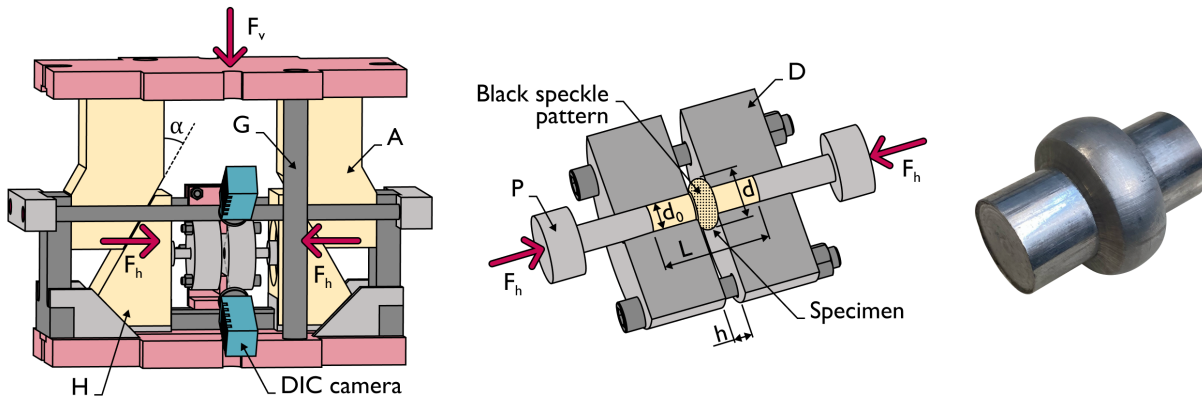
Tool set for performing the double-action radial extrusion formability tests showing the cameras used by digital image correlation, the detail of the dies and punches and a test specimen.
